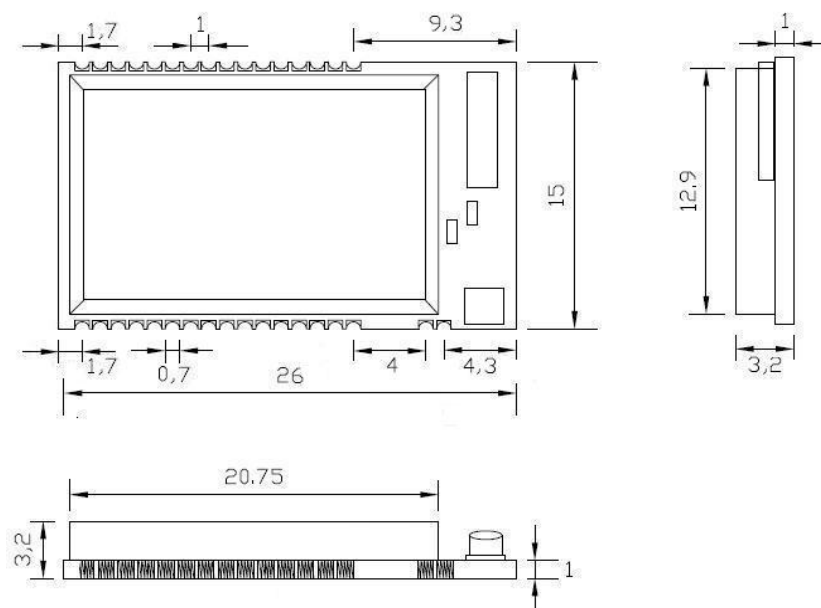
HPTZ01P-TTL Mechanical Dimensions
